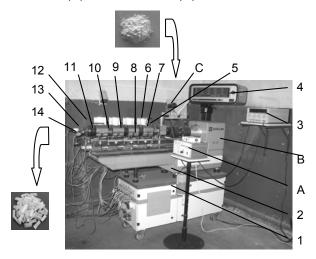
Extruding installation – general view A – Peristaltic pump; B - Extruder; C – Feeder. 1-Plasticizer tank; 2–Plasticizers feeding pipeline; 3- Power source; 4 – Control panel; 5- Supply hopper for starch; 6-Plasticizer pipe connection; 7-11 Area 01-05; 12-Cooling fan; 13-Area 06-Die; 14-Heater.
